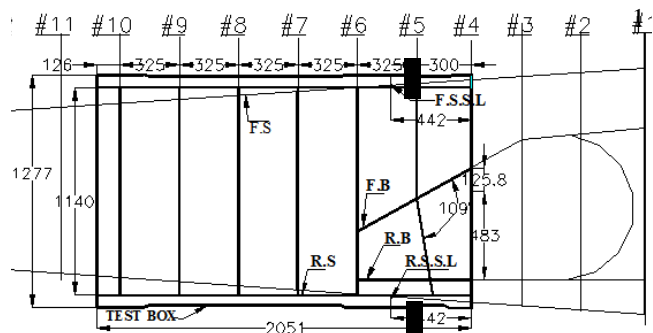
Portion of wing considered for design of wing test box (Black spot on front and rear spars indicates the location of splicing where inboard and board spars are joined together)
